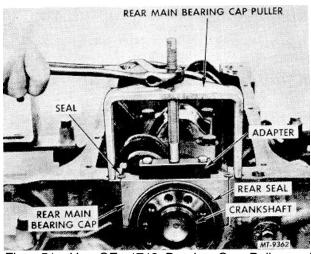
Use SE- 1719 Bearing Cap Puller and Adapter SE- 1719-3 to Remove Rear Main Bearing Cap
